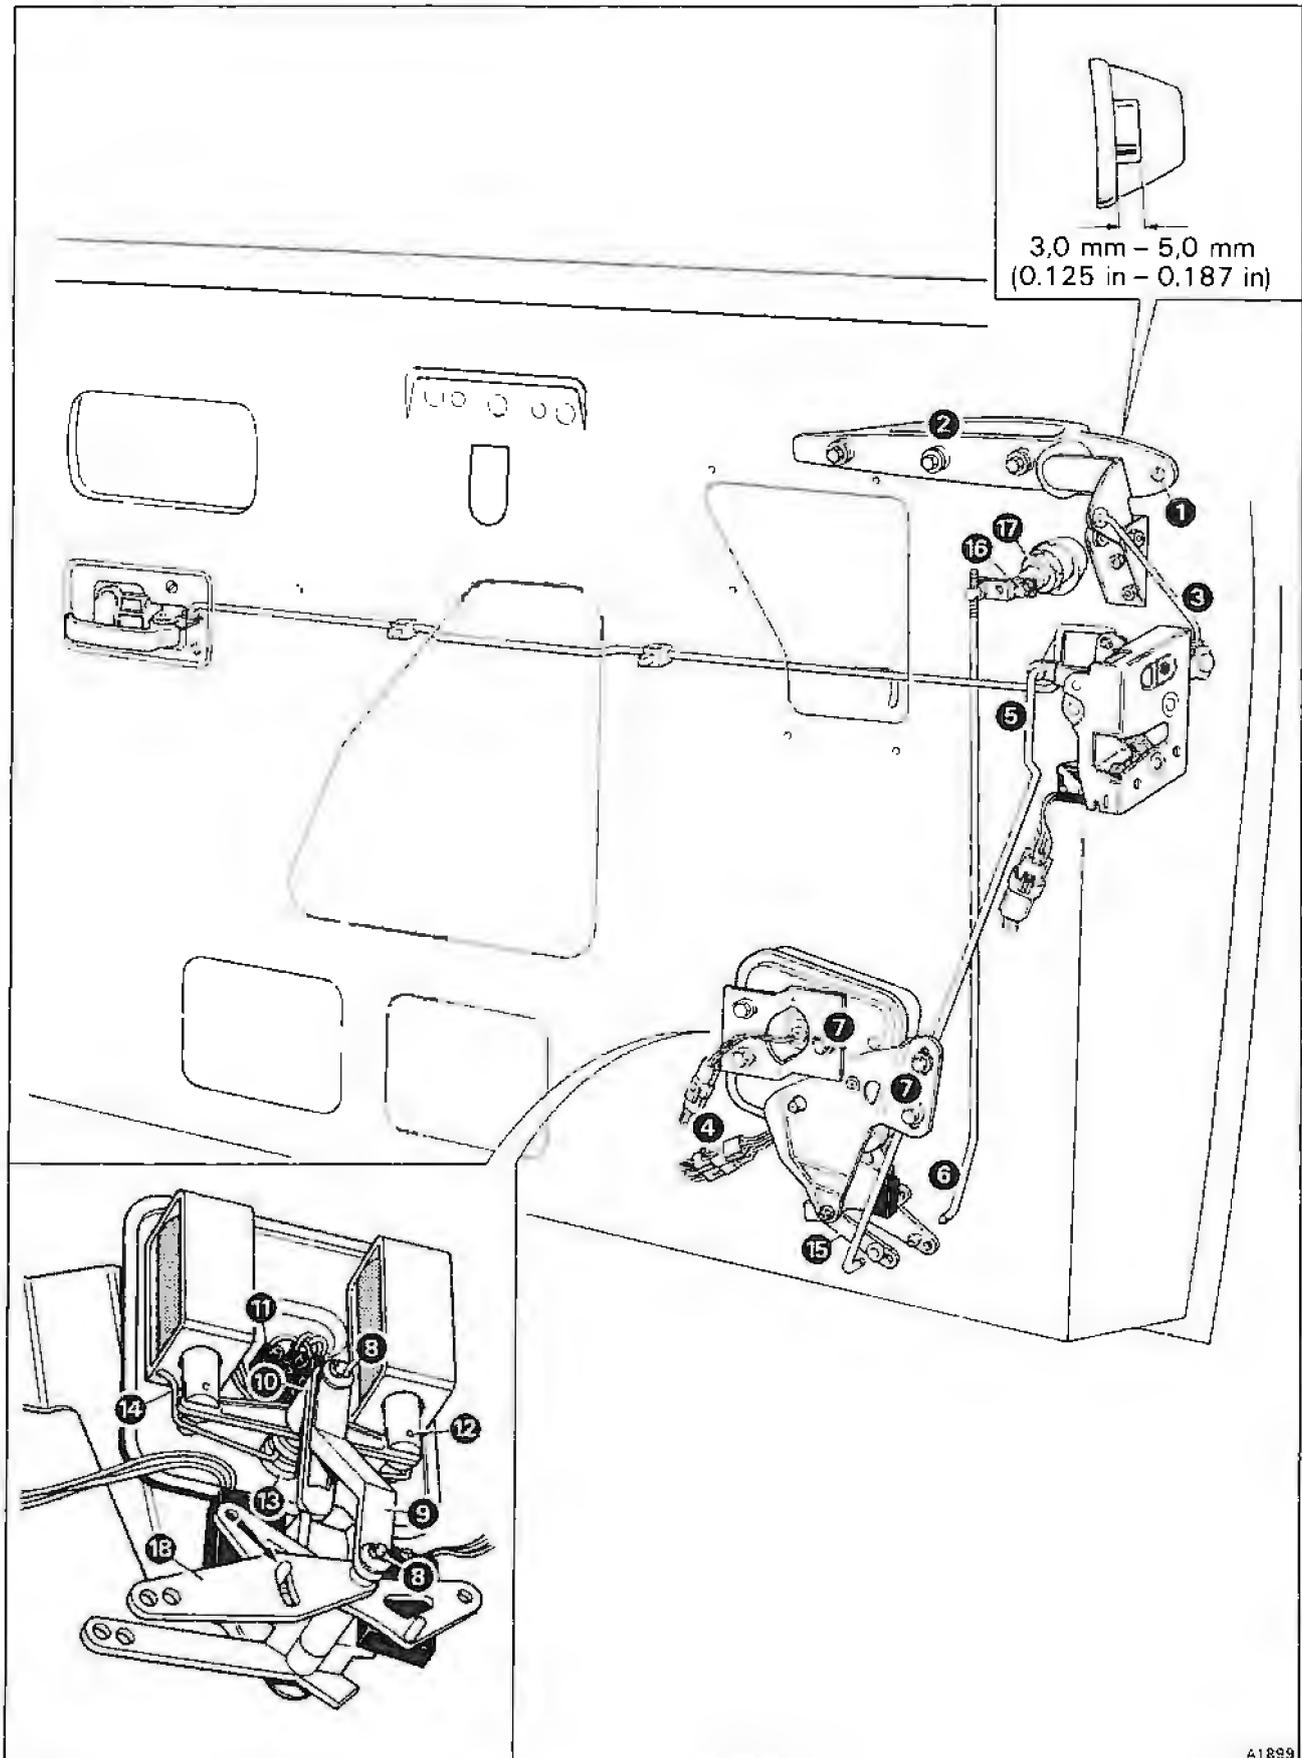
Exterior door handle, solenoid assembly, private lock unit, and fittings
